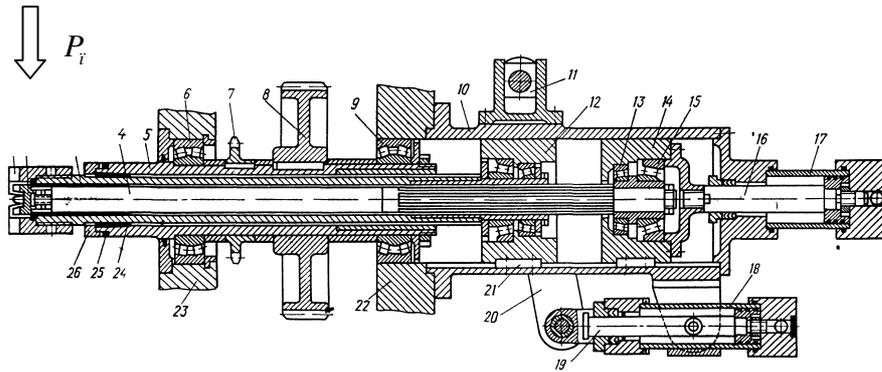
The design model spindle unit: 1 – outer spindle cam; 2 – cam internal spindle; 3 – outer spindle; 4 – inner spindle; 5 – shaft; 6, 9, 13, 15 – bearings; 7 – star; 8 – gear; 10 – sleeve; 11 – bearing; 12, 14 – clips; 16, 19 – stocks; 17, 18 – cylinder; 20 – leather; 21 – dowel; 22, 23 – rack frame; 24 – sleeve; 25 – lining; 26 – nut
